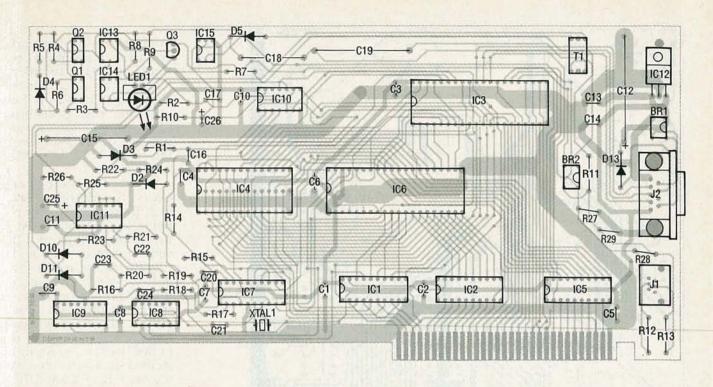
PARTS-PLACEMENT DIAGRAM. The card is assembled on a double-sided PC board that fits in an expansion slot on your motherboard.
